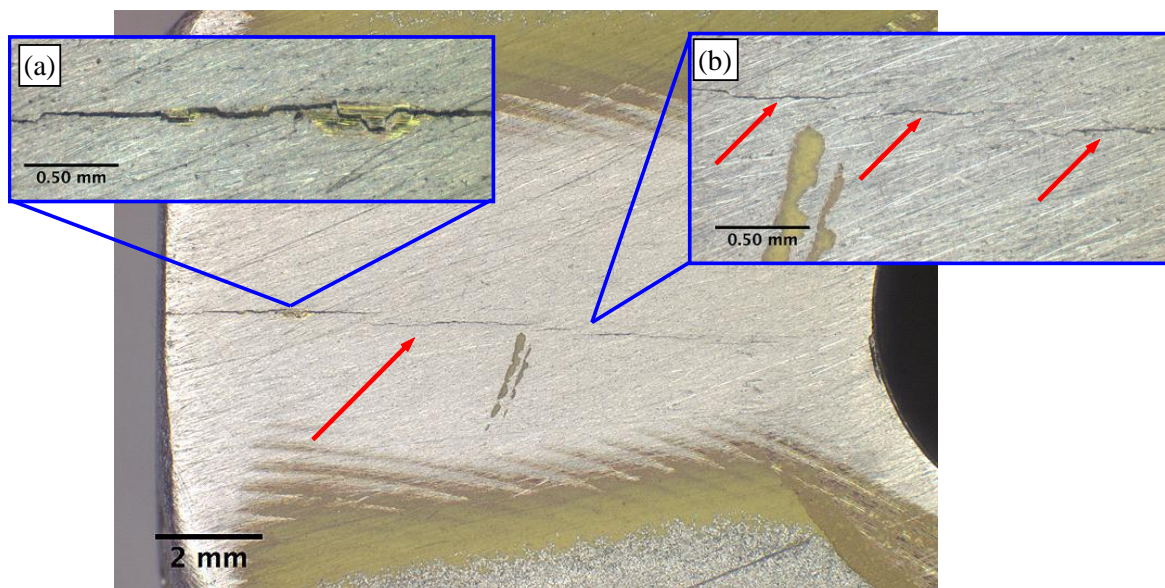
Photograph of the crack in the aft flange of the PC9 MLG folding strut (arrowed). Inset: (a) close up of the crack towards the end of the flange showing the crack to be gaping; inset (b) close up of the crack towards the actuator bolthole showing the presence of multiple crack branches (arrowed)
